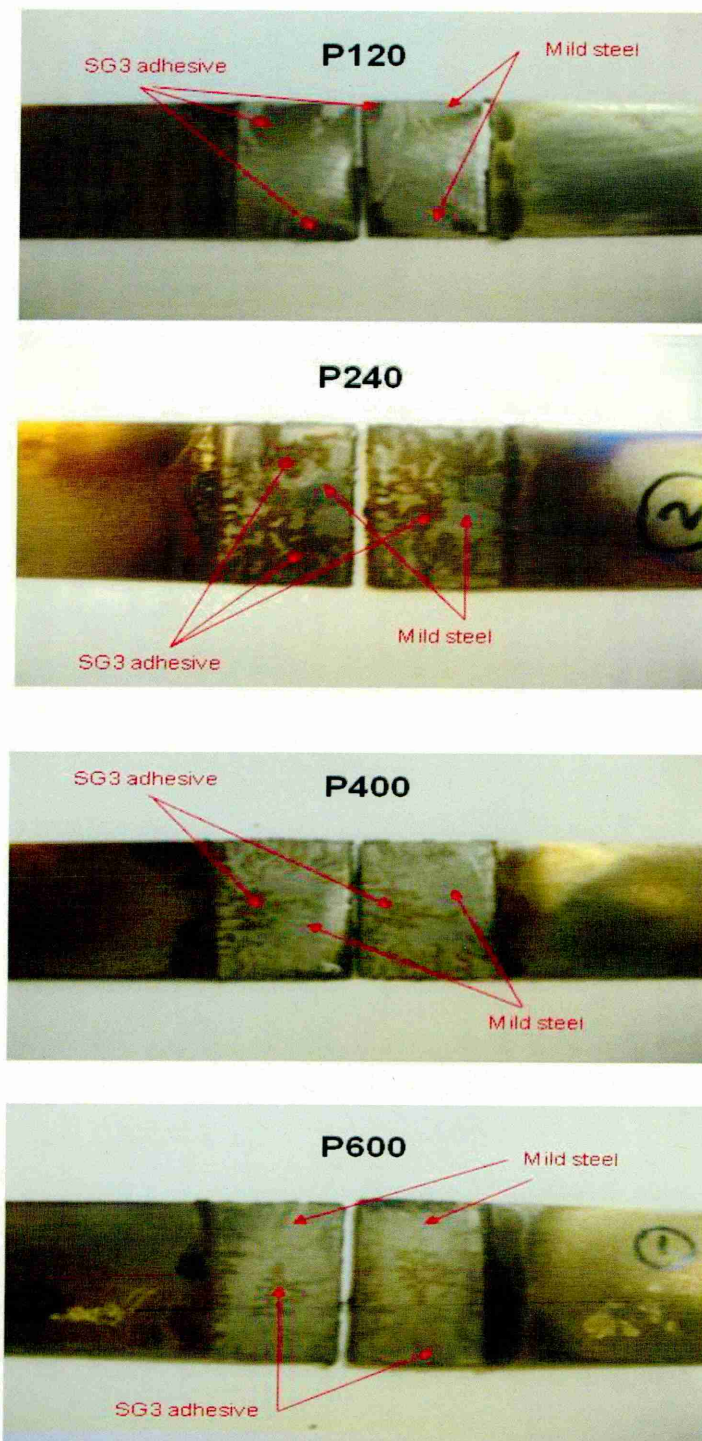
Fracture surfaces for mild steel lap joints with different initial surface roughness
